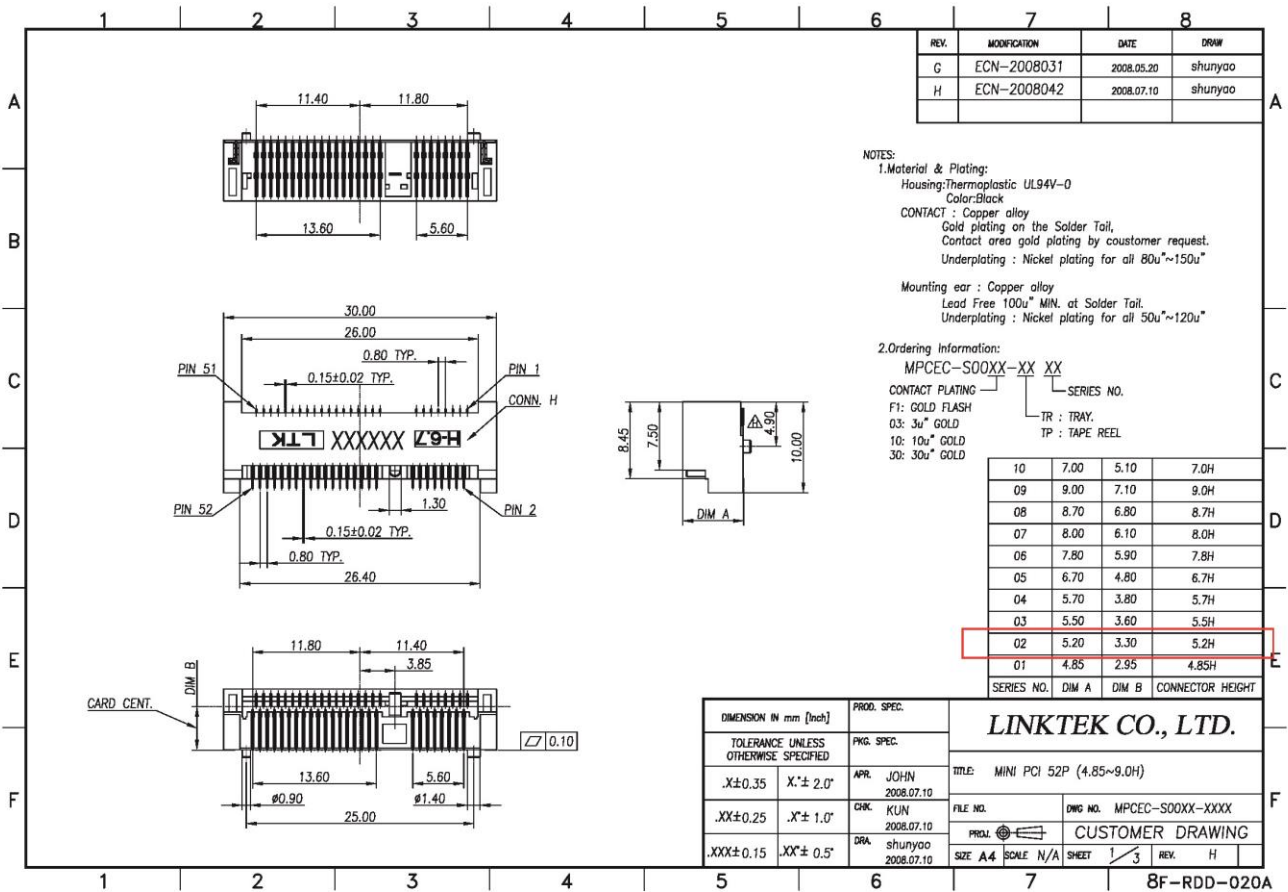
Mini PCI-E connector used on user board cooperating with JT421e LTE module
